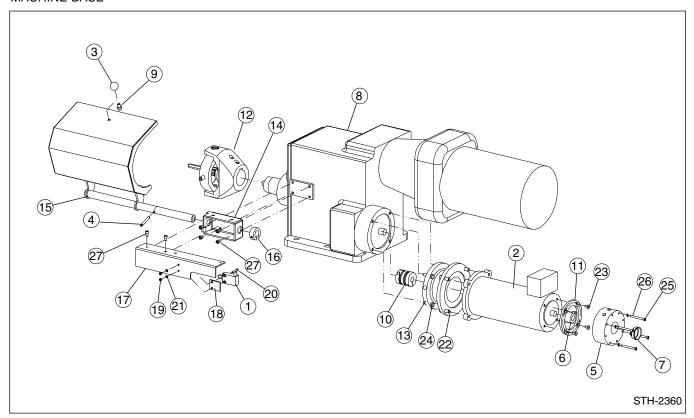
FIGURE F - SPINDLE DRIVE MOTOR (5kW)
